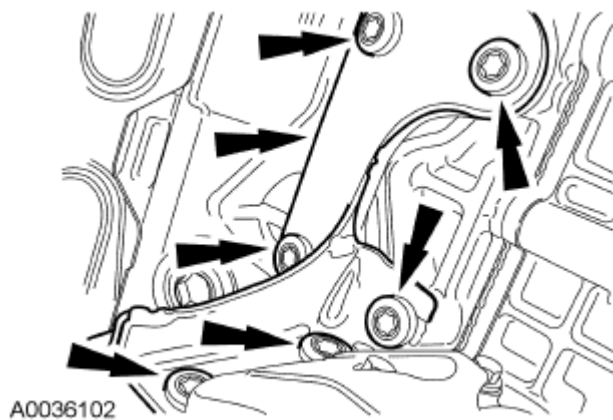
Locating Power Transfer Unit Support Bracket Bolts
